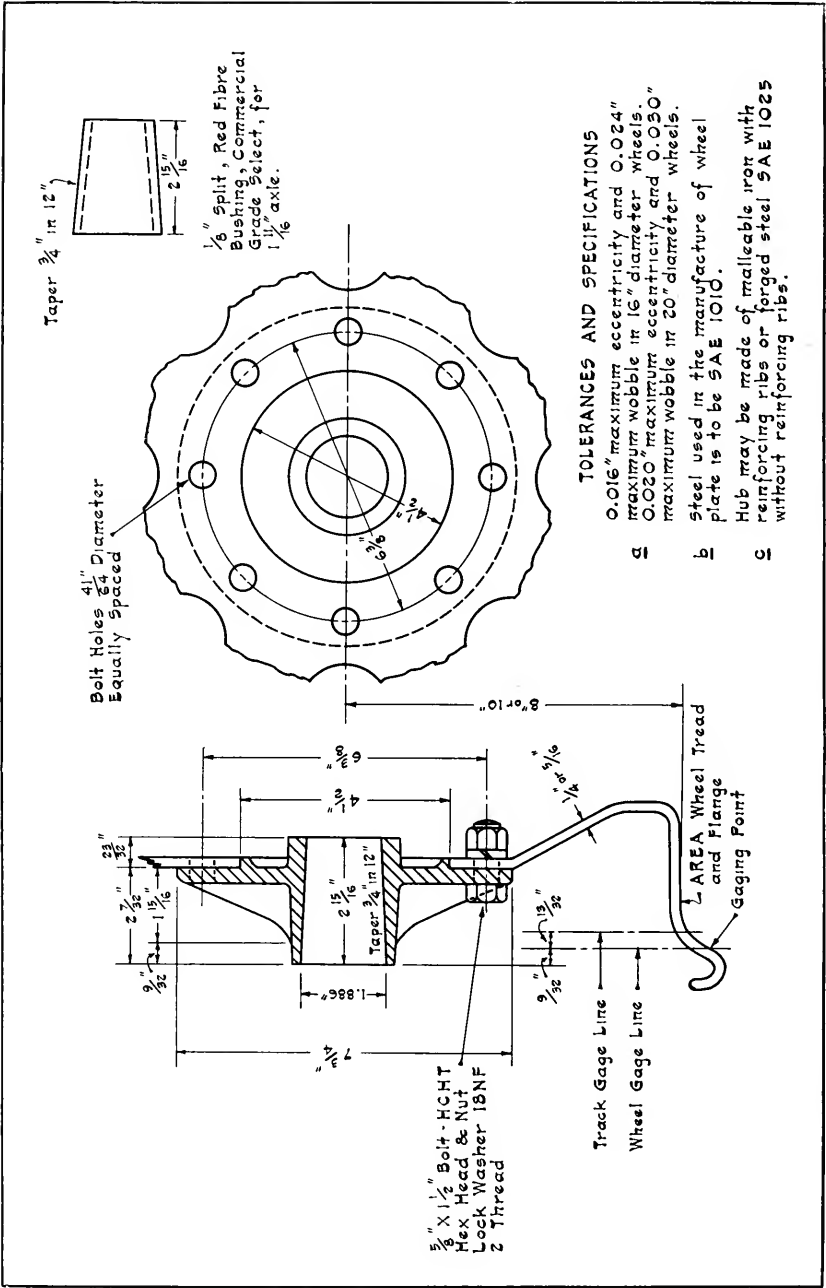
AREA 16-in and 20-in bolted demountable-plate insulated wheel and bushing for motor cars, trailers and push cars using 1 1/16-in axles.
